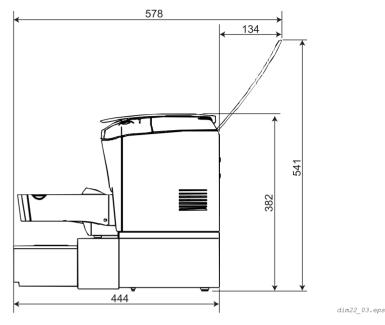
Right Side View of EPL-5900 with Optional Components Installed
